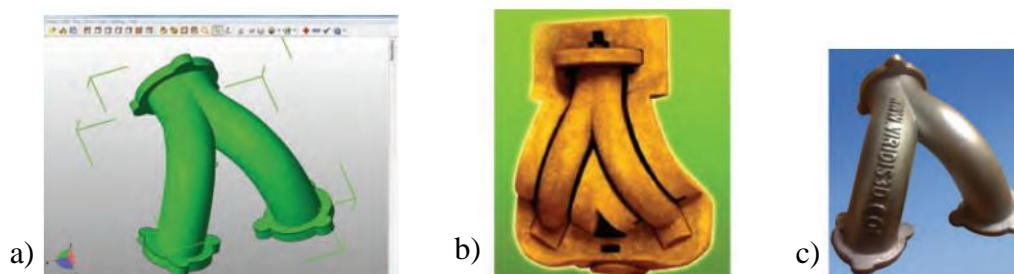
Technological route: part's file on the computer monitor (a); printed sand mold (b); finished casting (c)
